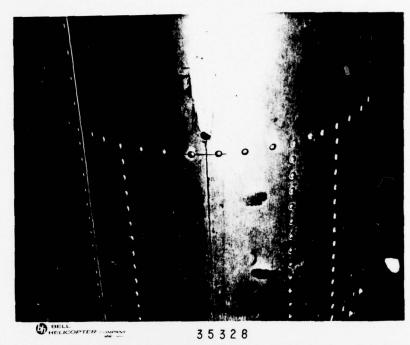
Strain Gauge Measuring Tailboom Lower Surface Skin Stress at Station 219, Bottom View
